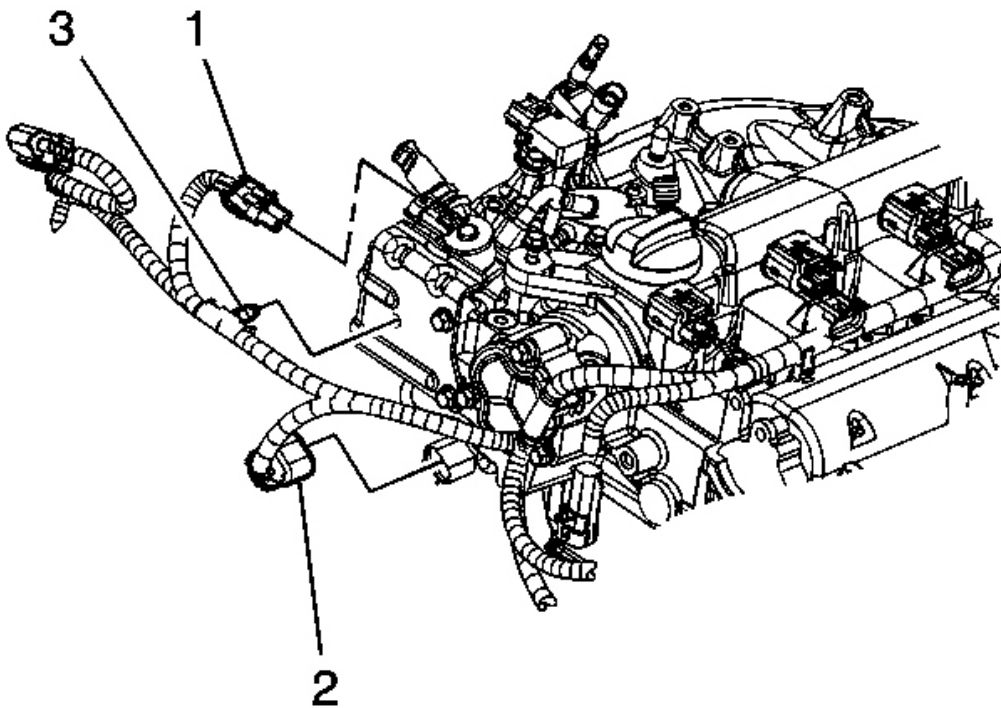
View Of Engine Wiring Harness & High Pressure Fuel Pump
